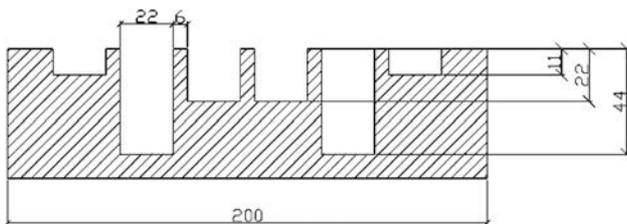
Cross section of the test sample element. All dimensions given in mm.
